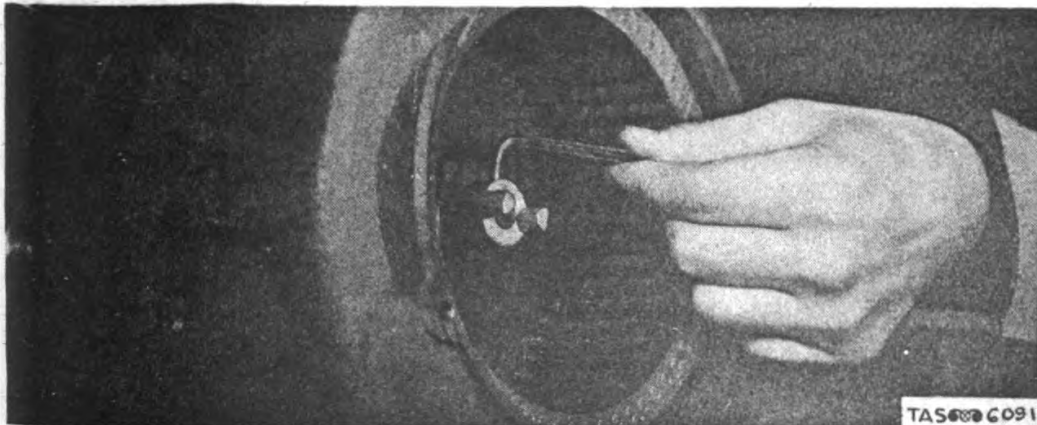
Loosening Set Screw on Steel Part of Flexible Coupling and Removing One-half of Steel Part of Coupling.
